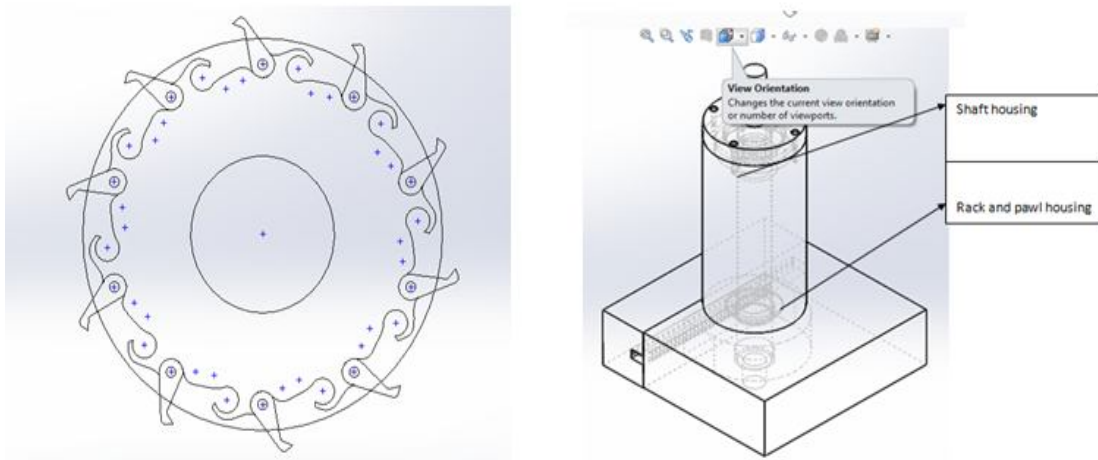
Rack with pawl mechanism and shaft housing (concept 2)
